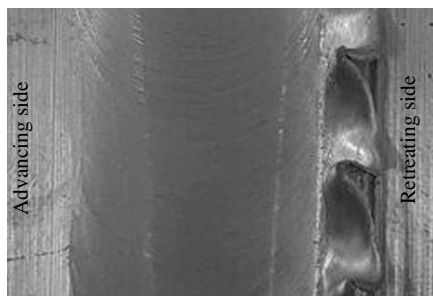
Flashing defect under the shoulder and retreating side of the weld in one of a tested cases (420 rpm, 50 mm/min).
